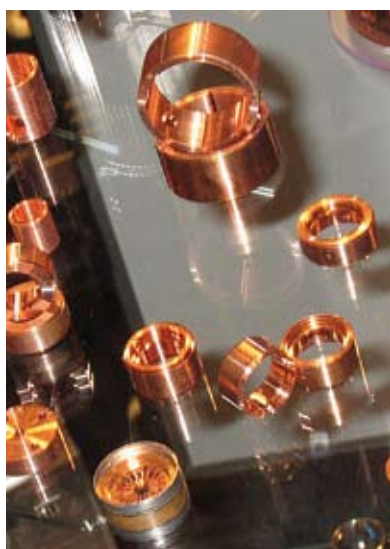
Products machined by Bakker Fijnmetaal. Their specialisation is the machining of copper.
